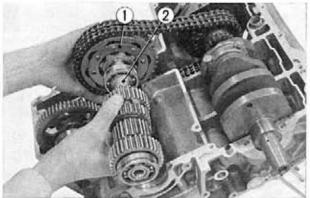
(1) Primary sprocket 2 Transmission mainshaft
